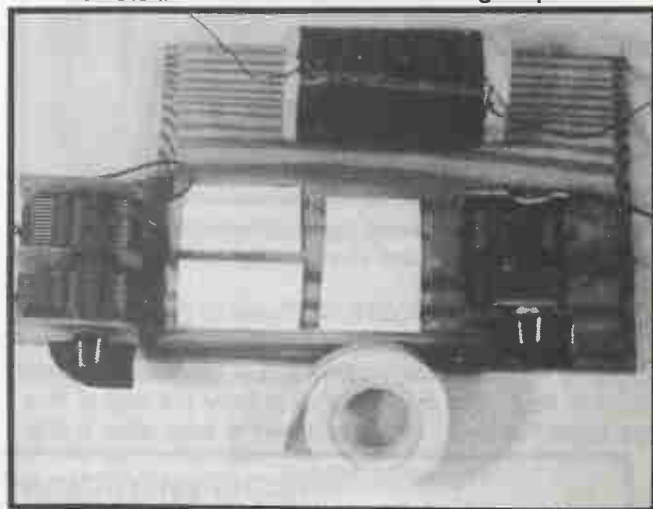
Installing double-sided foam mounting tape prior to securing tuning capacitors.
